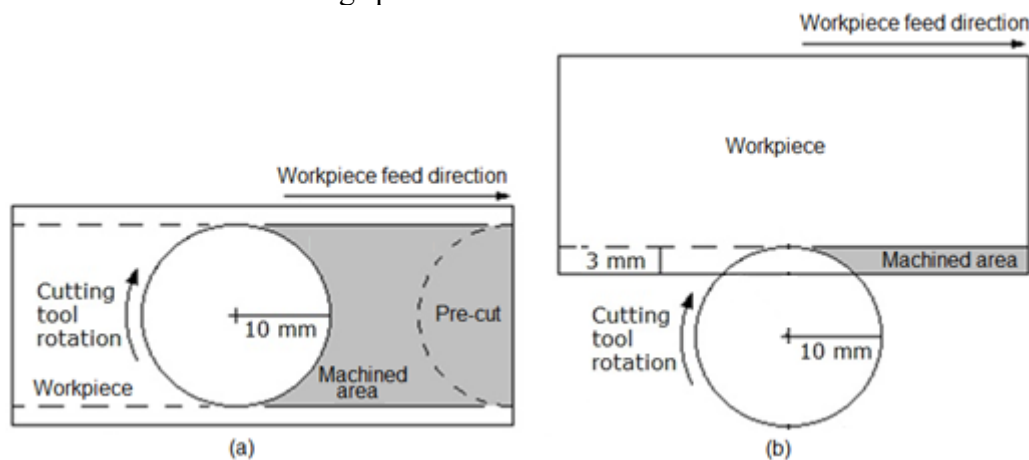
The diagram shows the position of the cutter relative to the workpiece (a) 100% engagement (b) 15% engagement
